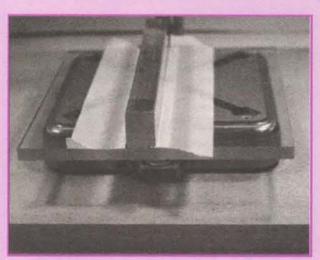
Glue the right-hand guide piece in place. Note that the lower edge is exactly parallel with the edge of the base. Check this alignment on the upper edge as well.
